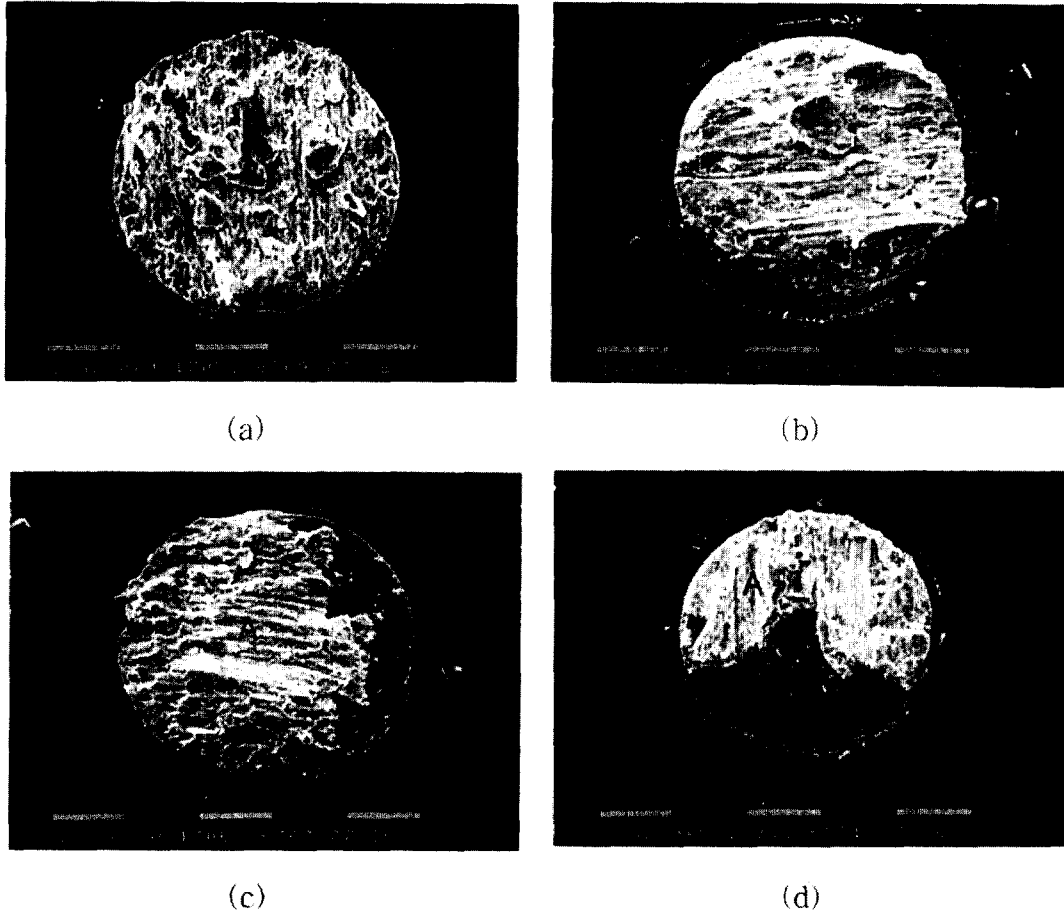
Top view of PbSnAg Solder Bump on an E-Ni/E-Cu A UBM after Ball Shear test
